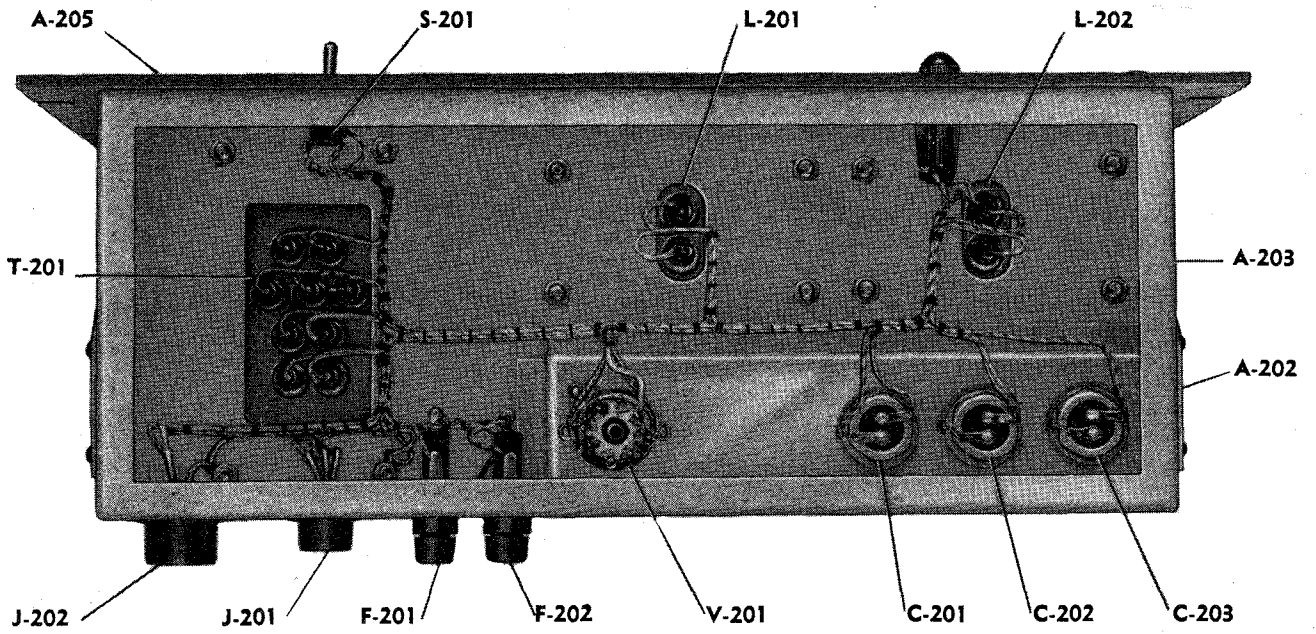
Rectifier Power Unit, Bottom View of Chassis
